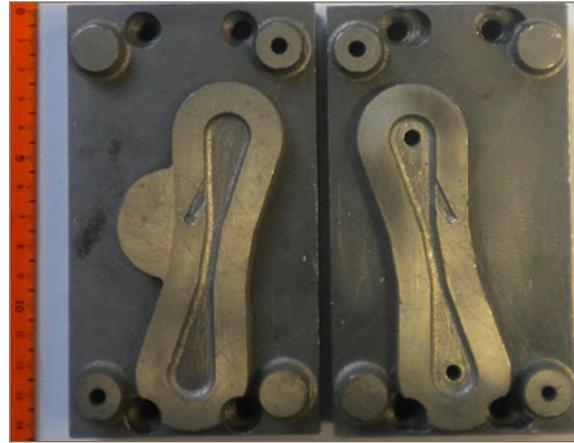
Facets of the moving and fixed half inserts. The surface finish is shown as it comes out of the EOS machine
